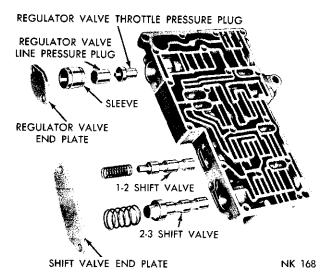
Valve Body—Shift Valve Side (Disassembled)
